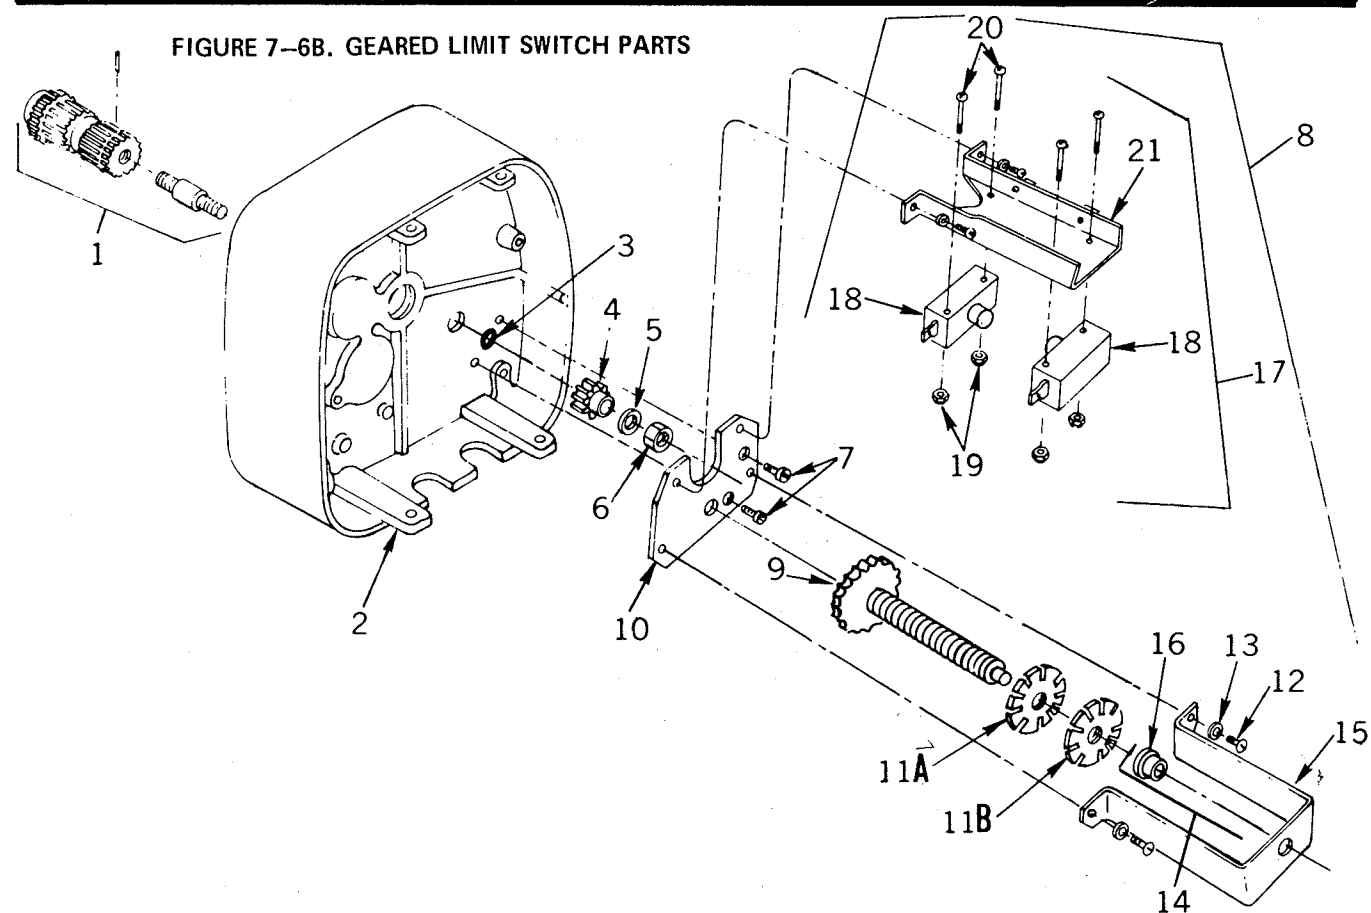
B. GEARED LIMIT SWITCH PARTS
